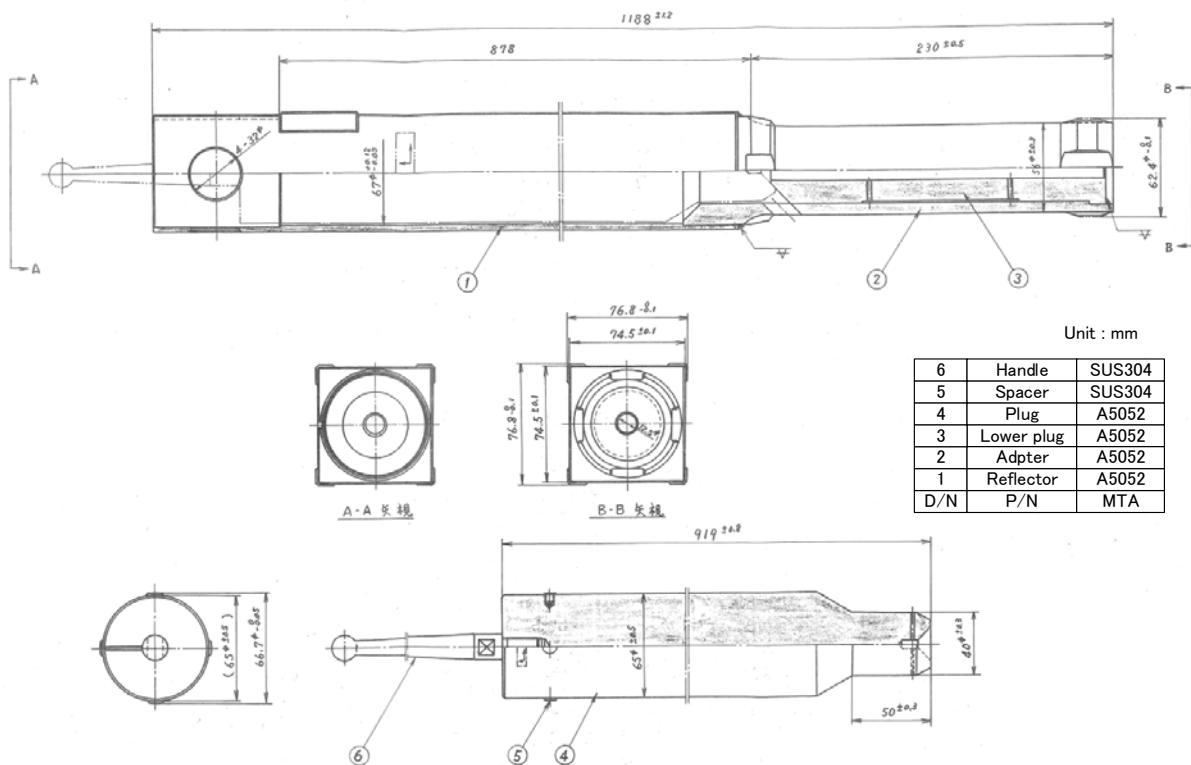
Outline diagram of the aluminum reflector and aluminum plug (E-type)
